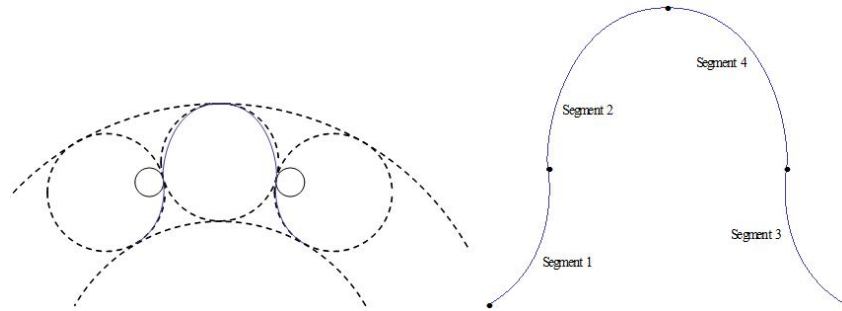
Single tooth of spur gear using a C-shaped spiral curve (left) and its segmentation (right).
